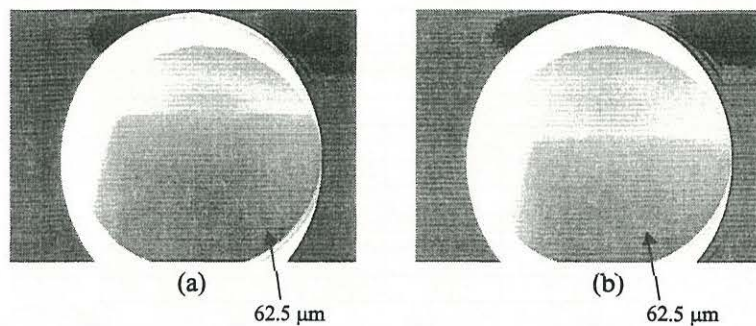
X-RAY INSPECTION OF STAINLESS STEEL MINI-ELEMENT WELDED BY TIG WELDING (a) LACK OF FUSION, (b) NO DEFECT
